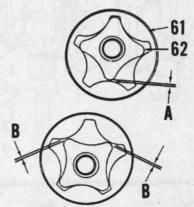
Refer to text for clearances (A&B) between oil pump outer rotor (61) and inner rotor
